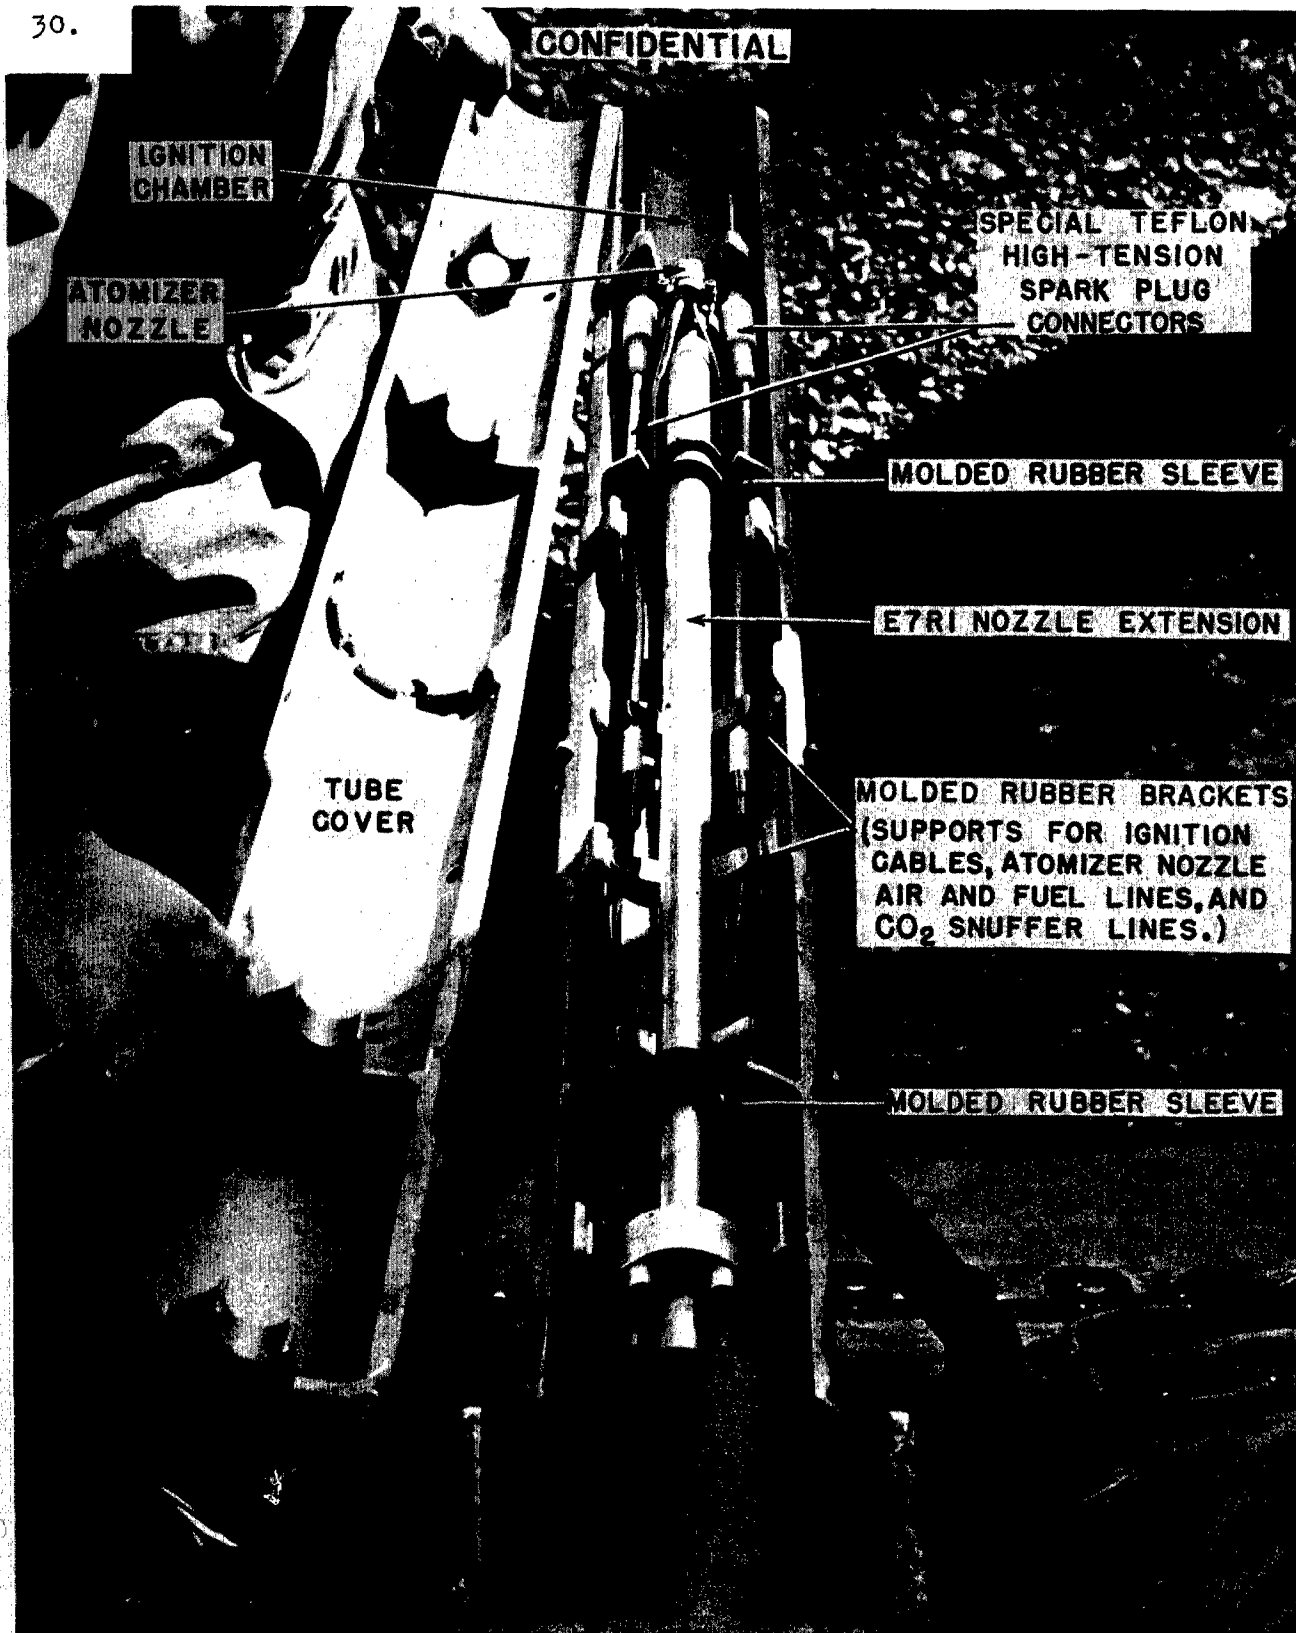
75 M.M. DUMMY GUN TUBE INSTALLATION
